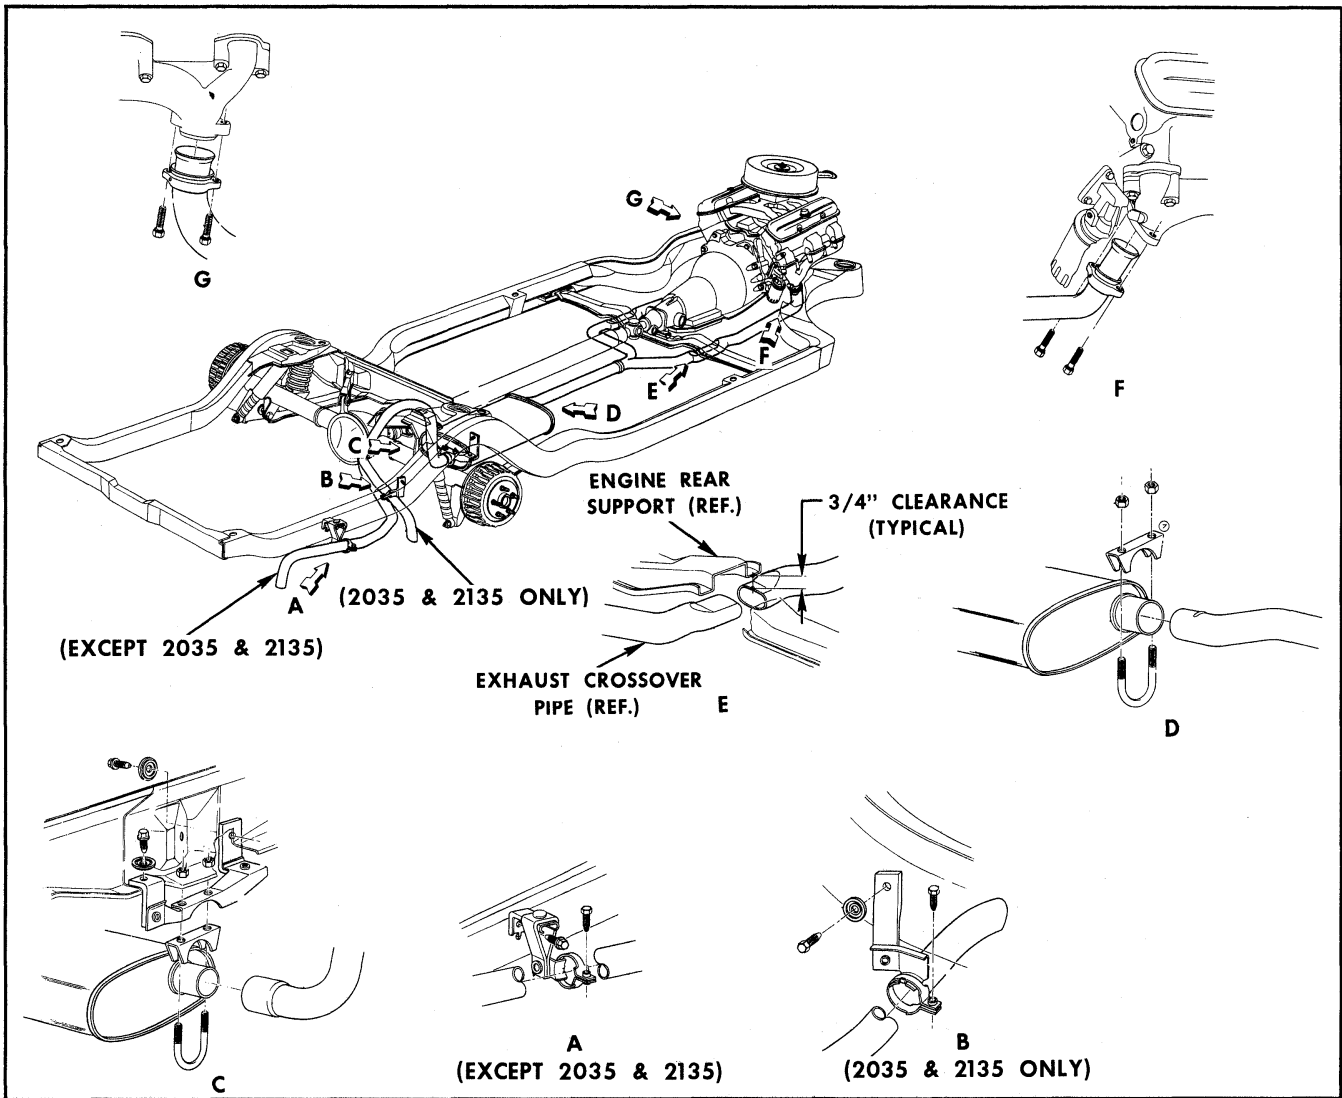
Exhaust System - Eight Cylinder Engine, Single Exhaust
